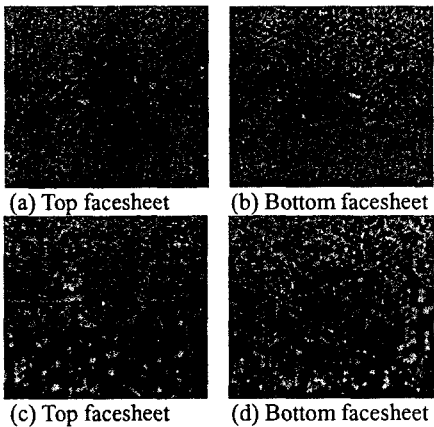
C-scan of damaged sandwich composite panels ( $[0/45/-45/90]_{2s}$  facesheets)
